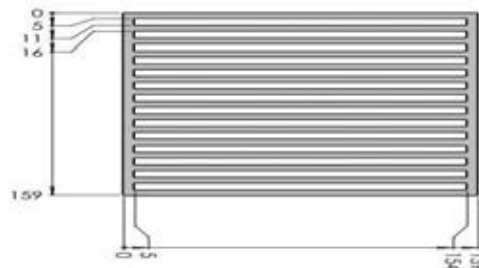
Geometry of perforated plate, all dimensions are in mm.
